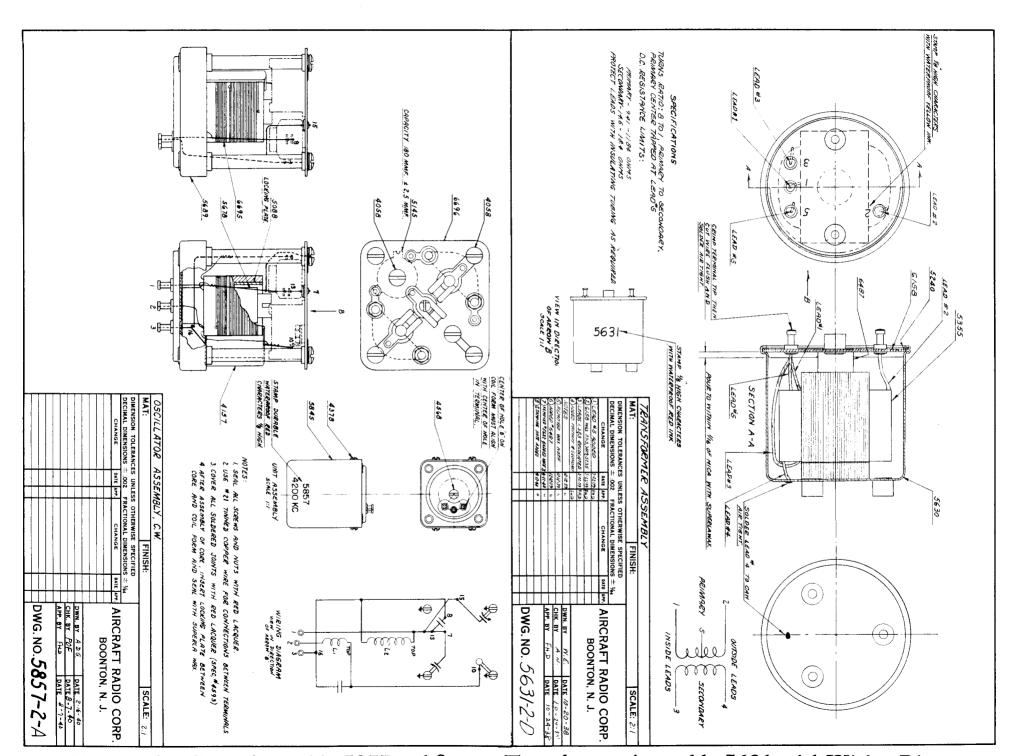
CW Oscillator Assembly 5857 and Output Transformer Assembly 5631, with Wiring Diagrams
